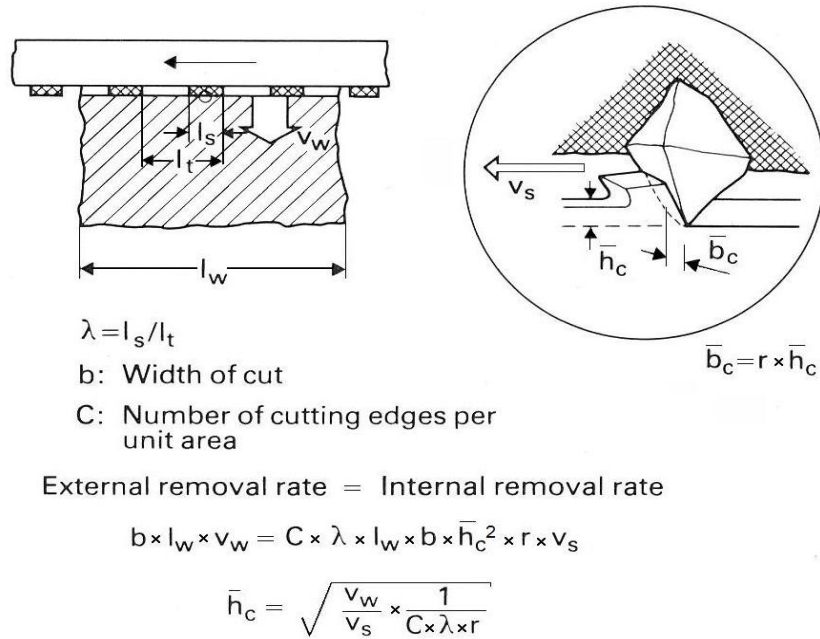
Definition of Mean Chip Thickness with Linear Tool Movement [2]
